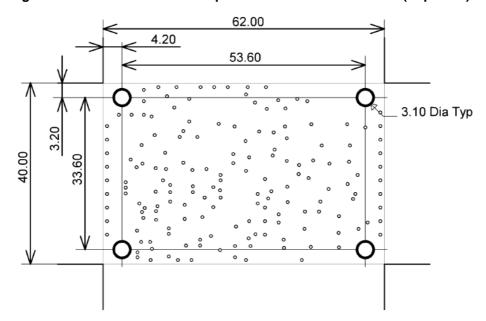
Medio P232/P233 Coupler: Mechanical Dimensions (Top View)
